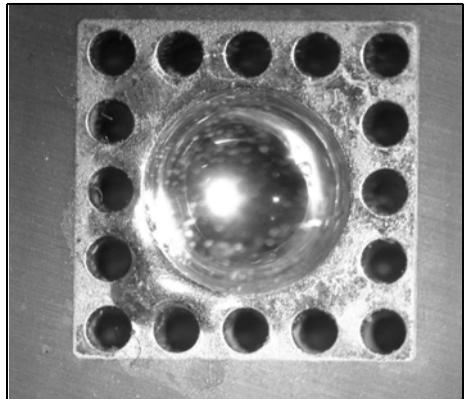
View of the holes used to feed solder to the earth surface in the IC.
